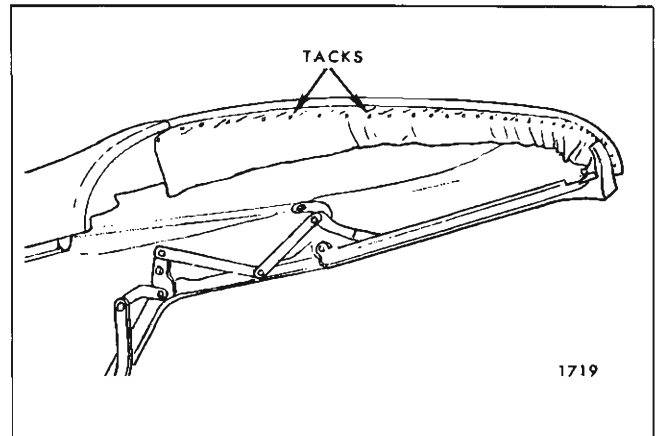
Installation of Top Material to Front Roof Rail
